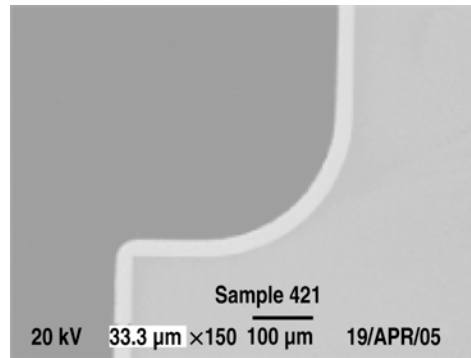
The gold electroplated coating on a 6 mm diameter specimen with a 0.2 mm concave corner radius. The coating is 25 μm thick and was deposited at a current density of 4.3 ma/cm^2 . The coating is uniform throughout the corner.
